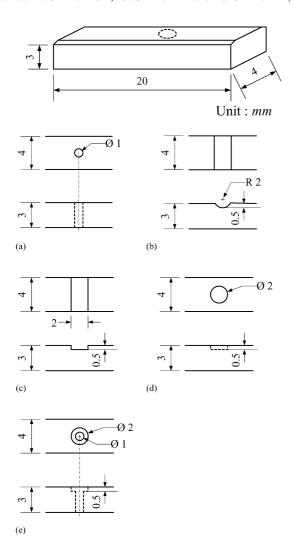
Schematic drawing of machined specimen: (a) type A: through-hole, (b) type B: semicircular groove, (c) type C: square groove, (d) type D: spot facing with bottom and (e) type E: spot facing.
